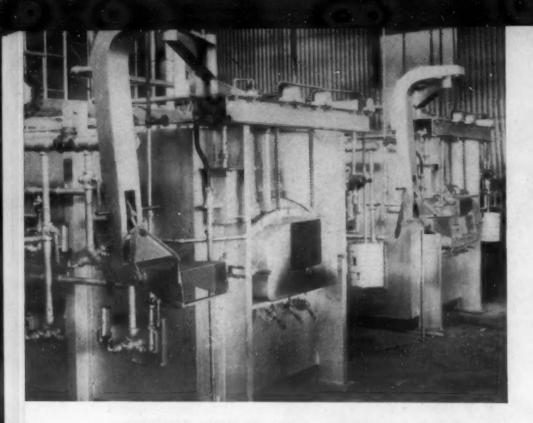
Batch Type Gas Carburizing Furnaces, at Electric Auto-Lite Co., Toledo, Built by Surface Combustion Co. These furnaces carburize clutch pinions, bodies and housings. The charge is loaded on alloy pans and these in turn are loaded into the cast alloy muffle 6½ ft. long, 29 in. wide. The muffle is heated by gas burners firing above and below the muffle. It takes 1½ hr. to bring the charge to 1700 deg. F., and it is then held 3 hr., to give an 0.028 in. case on 4620 steel.
